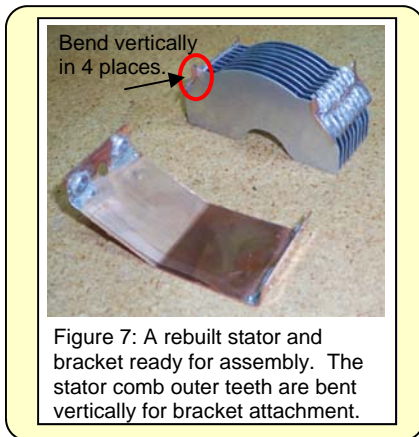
A rebuilt stator and bracket ready for assembly. The stator comb outer teeth are bent vertically for bracket attachment.
